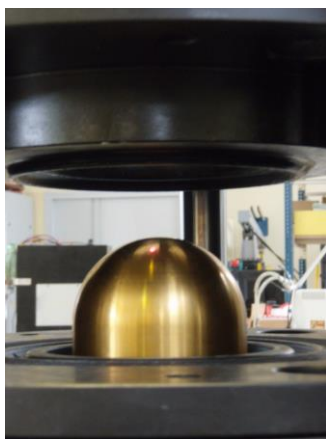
Hemispherical deep drawing. Geometry of the tools
